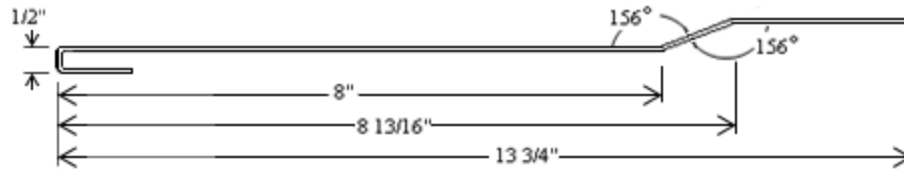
Flat view and side profile of Baffle-1, dimensions in inches.
